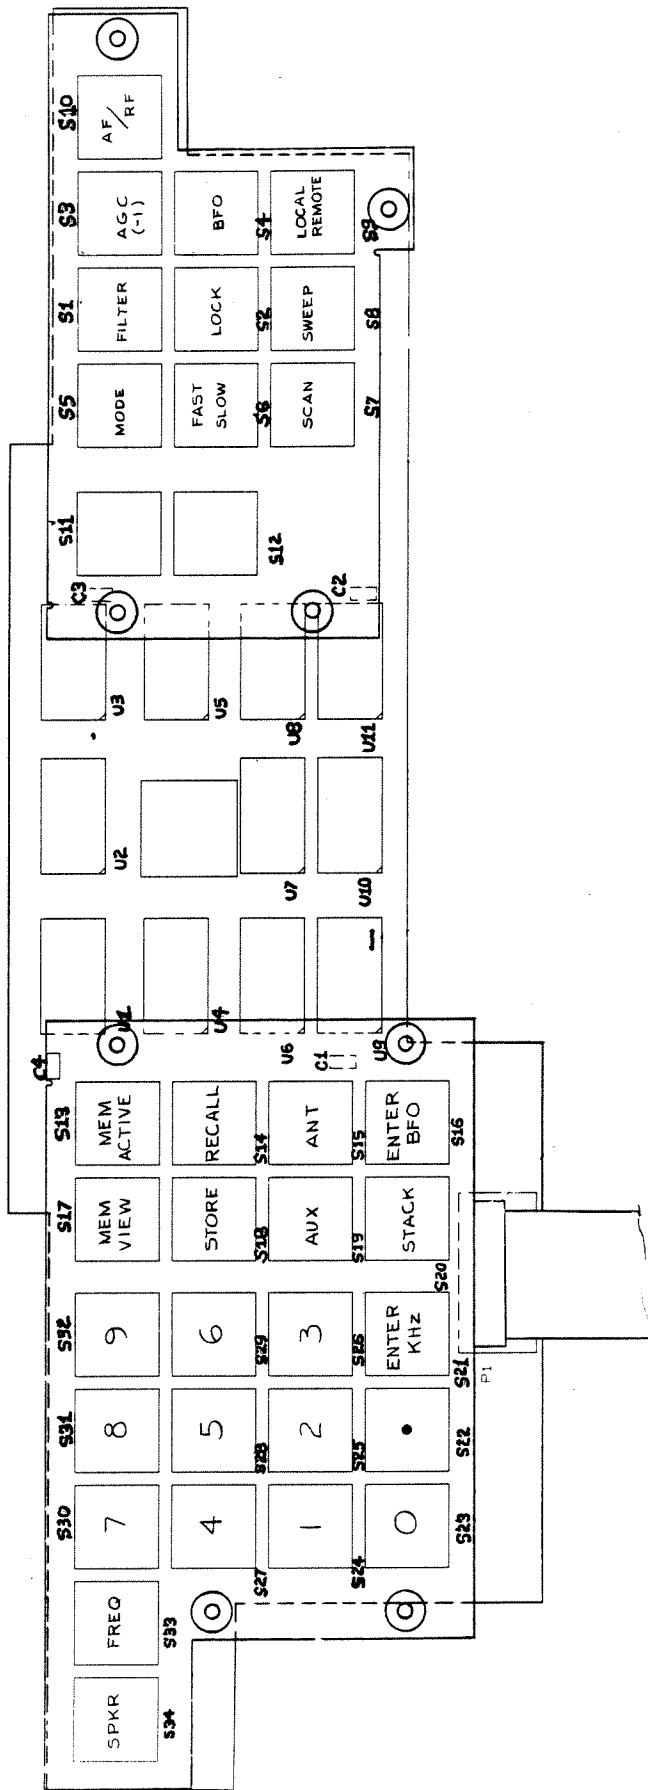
B. Front Panel Switches A7A2, Circuit Card
